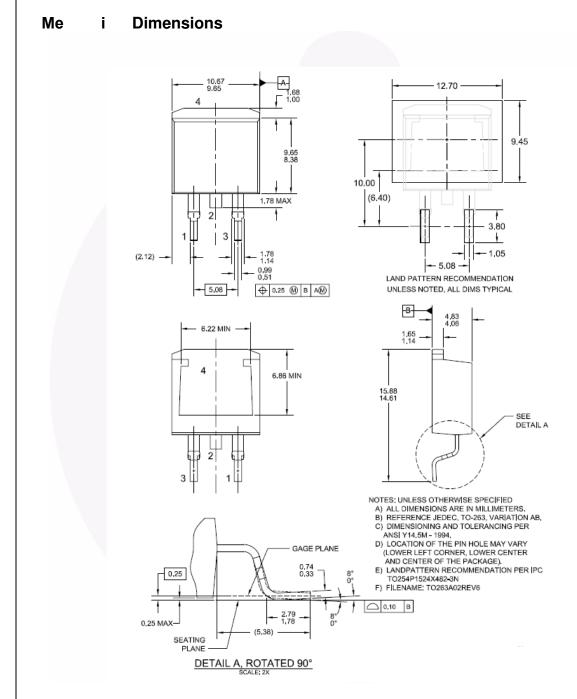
TO-263 2L (D2PAK) - 2LD,TO263, SURFACE MOUNT
